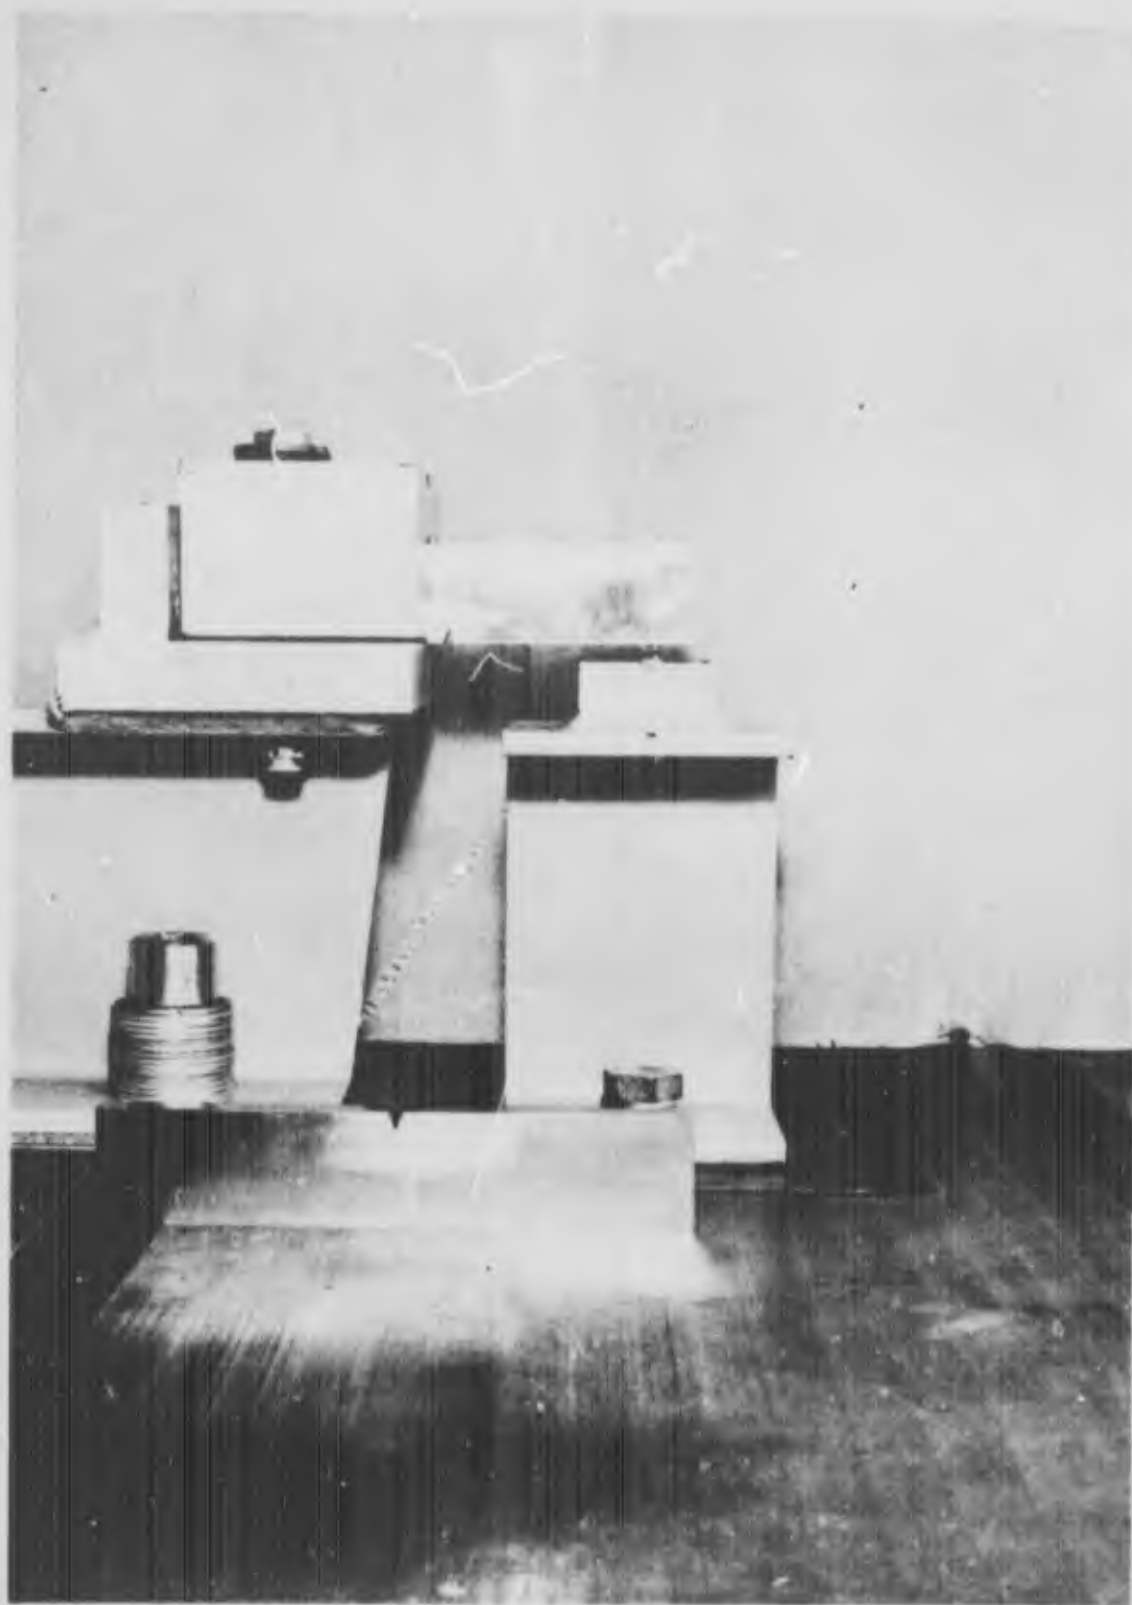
Notched Bend Specimen Precracking Fixture
